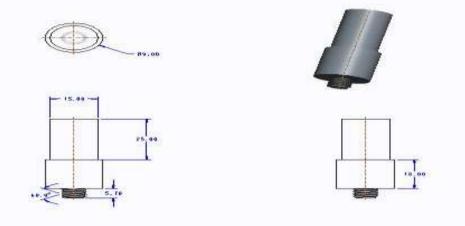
Friction stir welding tool (cylindrical threaded)
